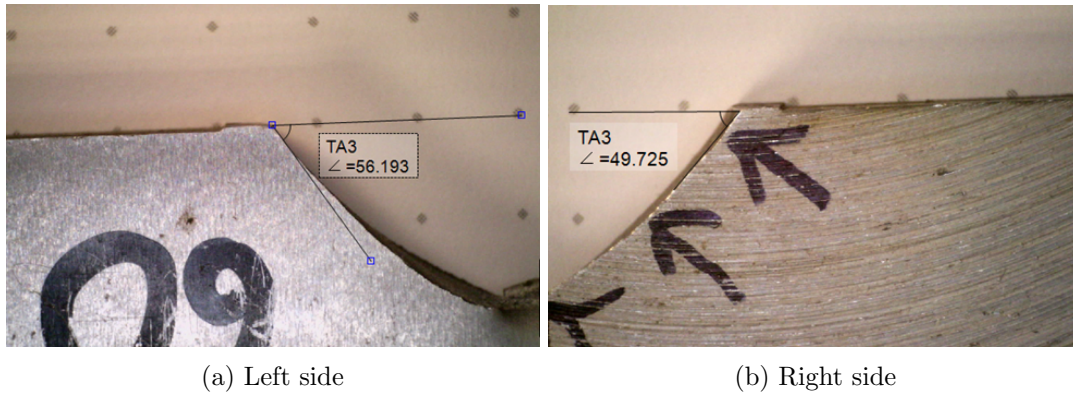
Macroview on the fracture surface of specimen tested for 30° (initial crack length – notch+precrack=20.678 mm /max 20.877)
